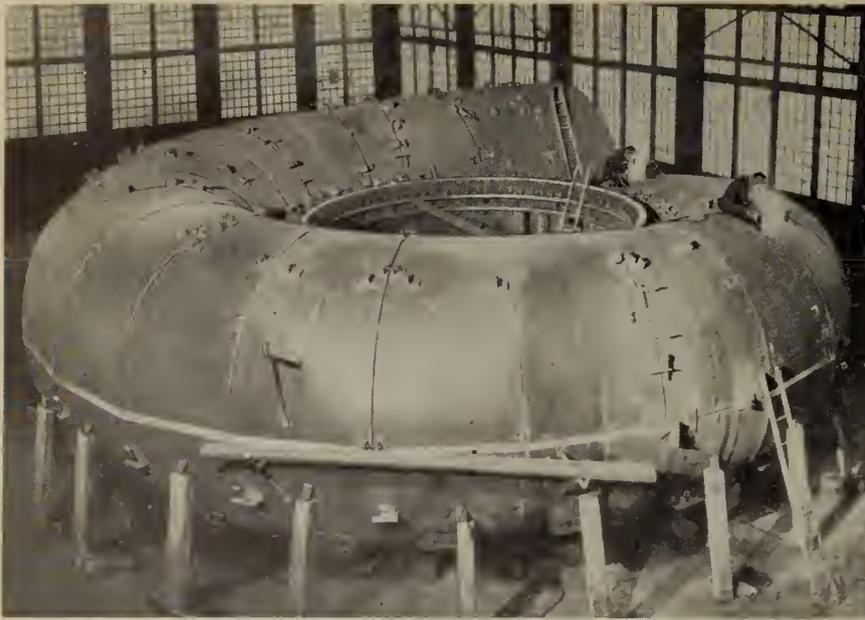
Shop erection view of all-welded plate steel spiral casing for 90,000 hp. hydraulic turbine.
